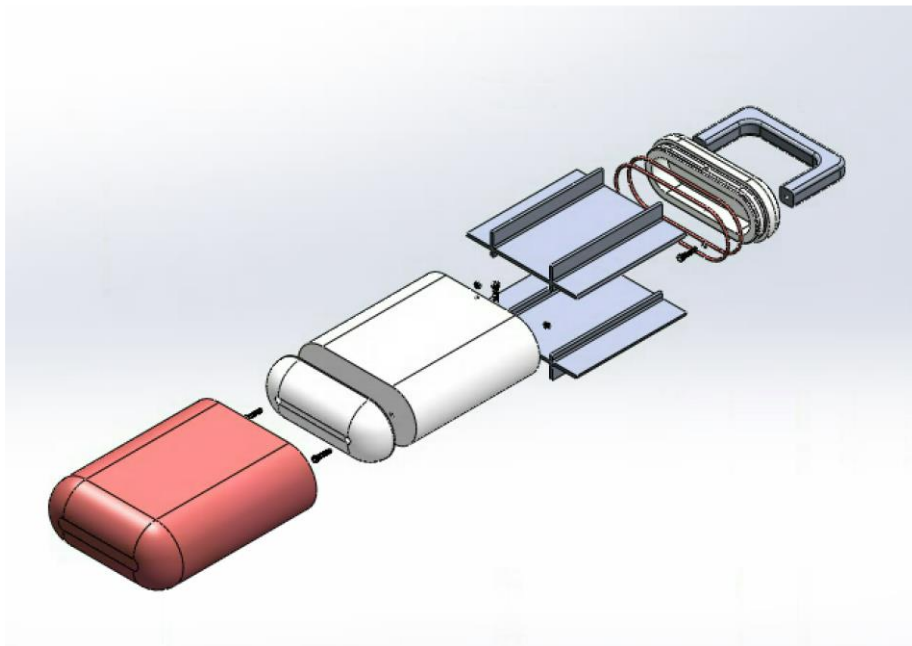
Isometric View of Exploded RED Mechanical Assembly
